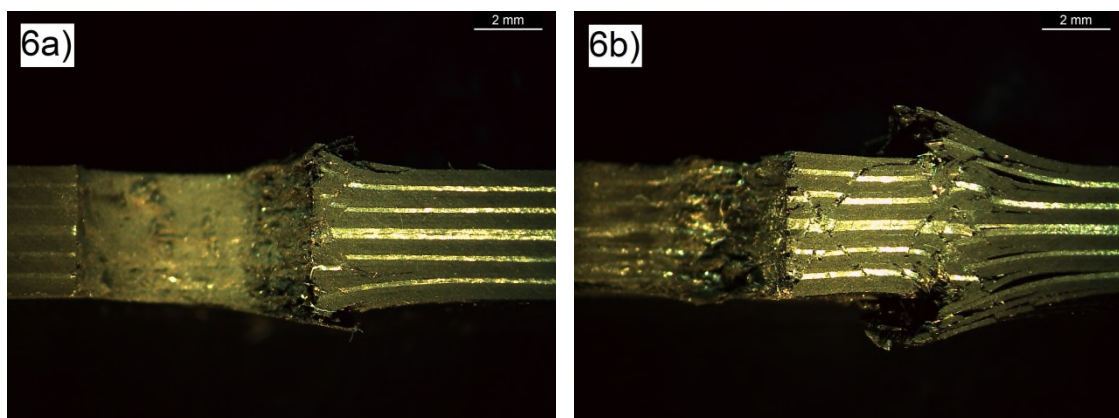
Characteristic image of failure under fatigue loading at loading levels past the specimen static load bearing capability, a) without bolt pre-tightening, b) with bolt pre-tightening. Specimens failed under excessive (4%) bolt-hole elongation.
